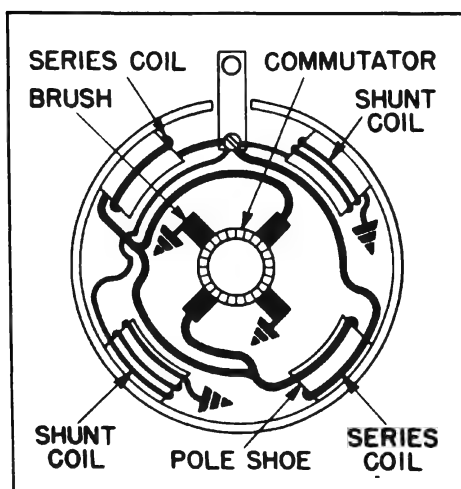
Cranking Motor Circuits—401 and 425 Engines
